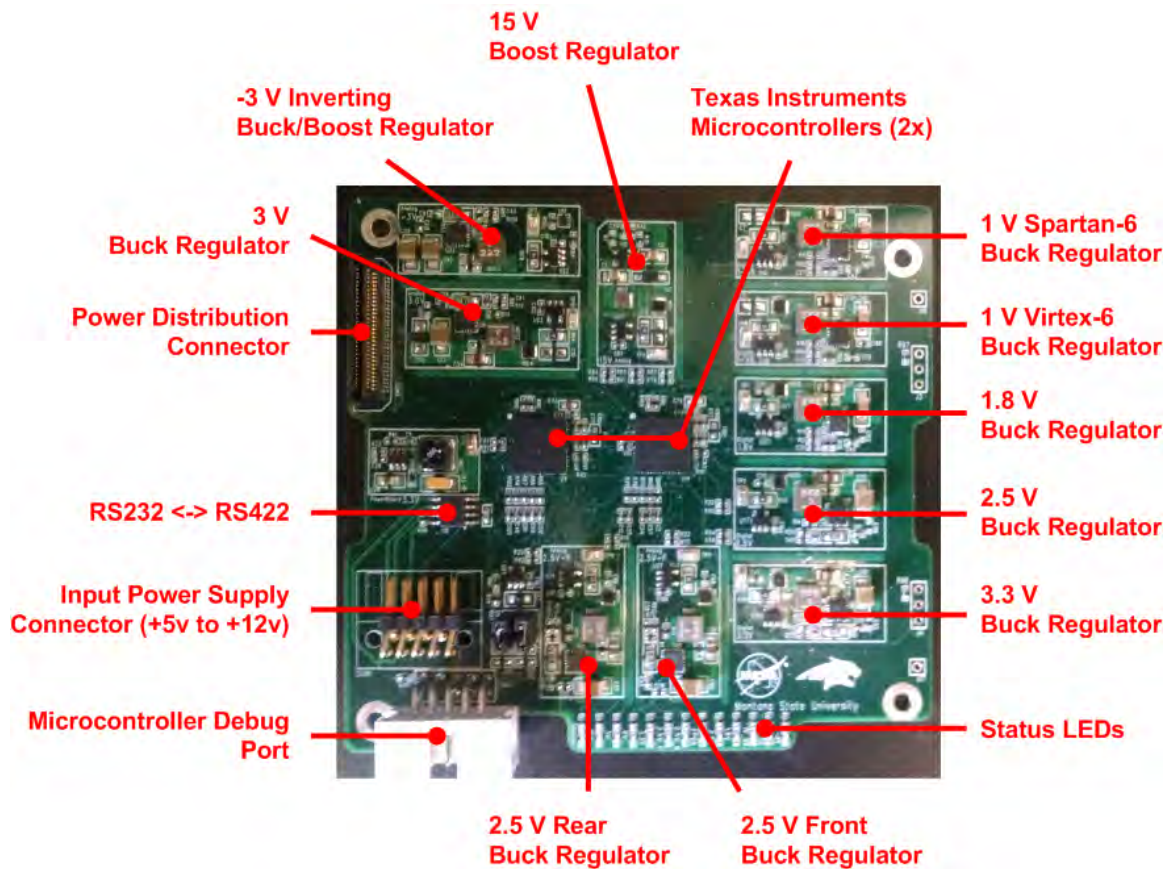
Annotated picture of a fully assembled power conditioning board
